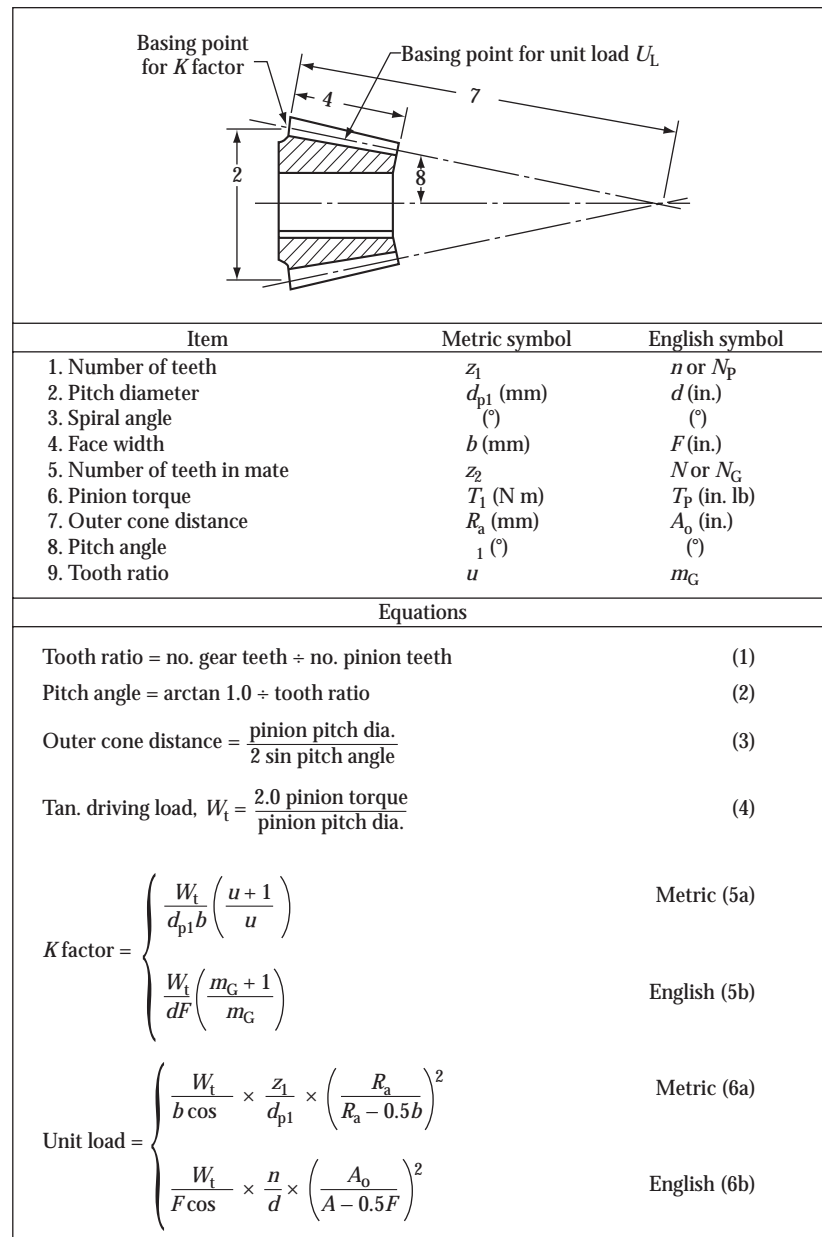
The method for calculating indices of tooth loading for straight or spiral bevel gears at a 90° shaft angle.
